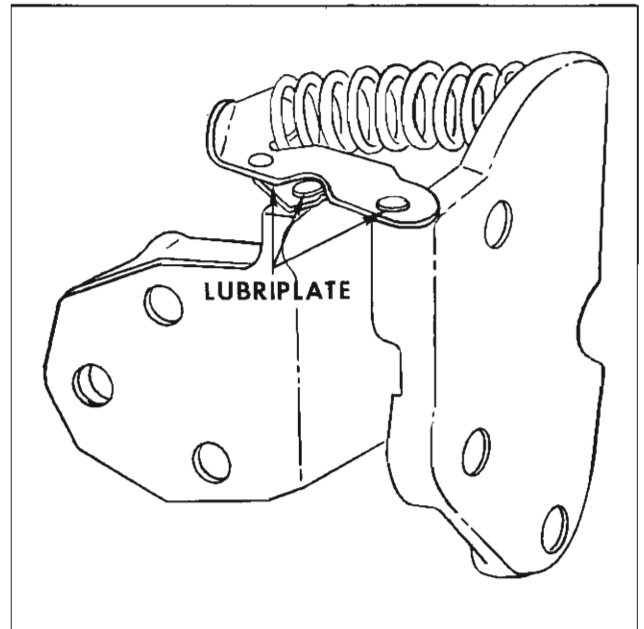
Front Door Hinge and Hold Open - Tempest
